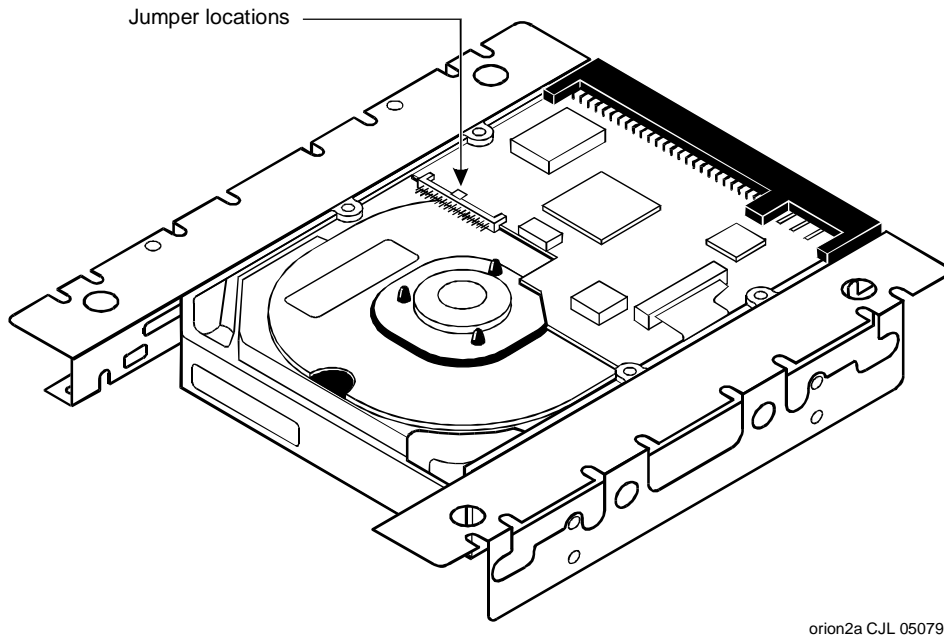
Jumper Locations on the Type B Hard Disk Drive: Type B
